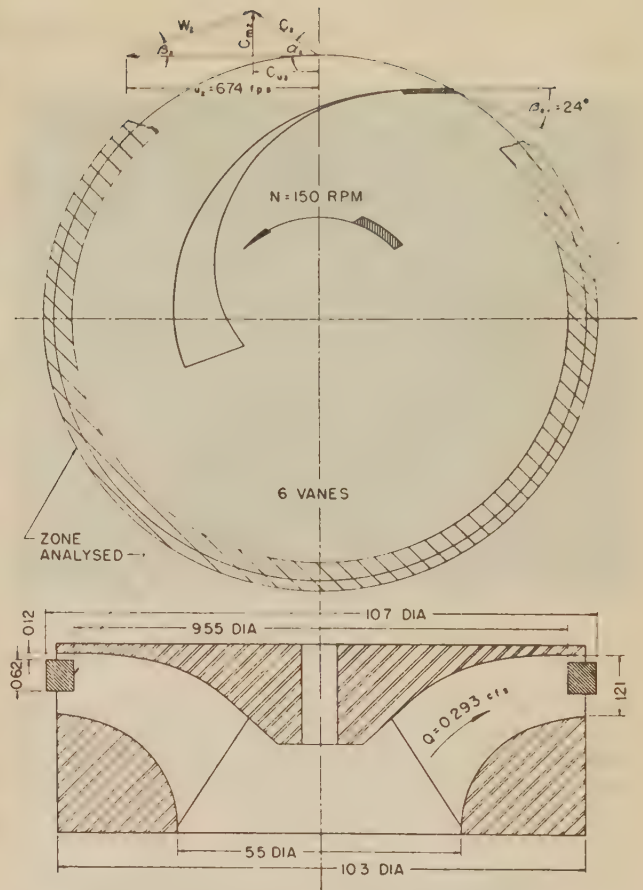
PRINCIPAL DIMENSIONS OF TEST IMPELLER
